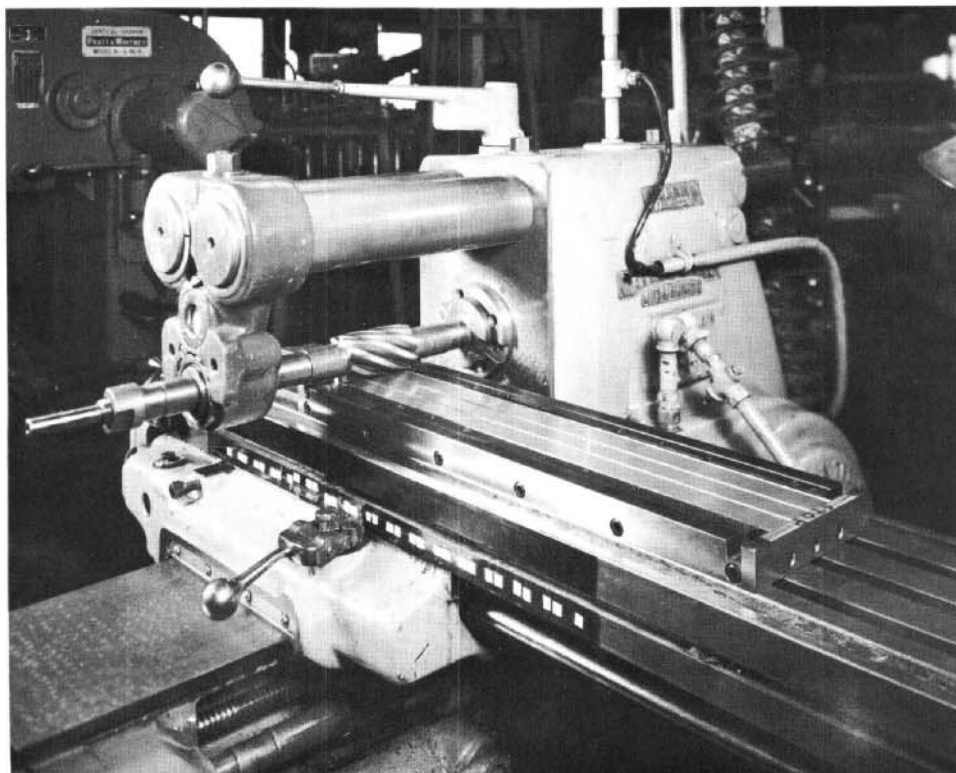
Machining Subassembly Side Strips and Outer Wire Spacers
